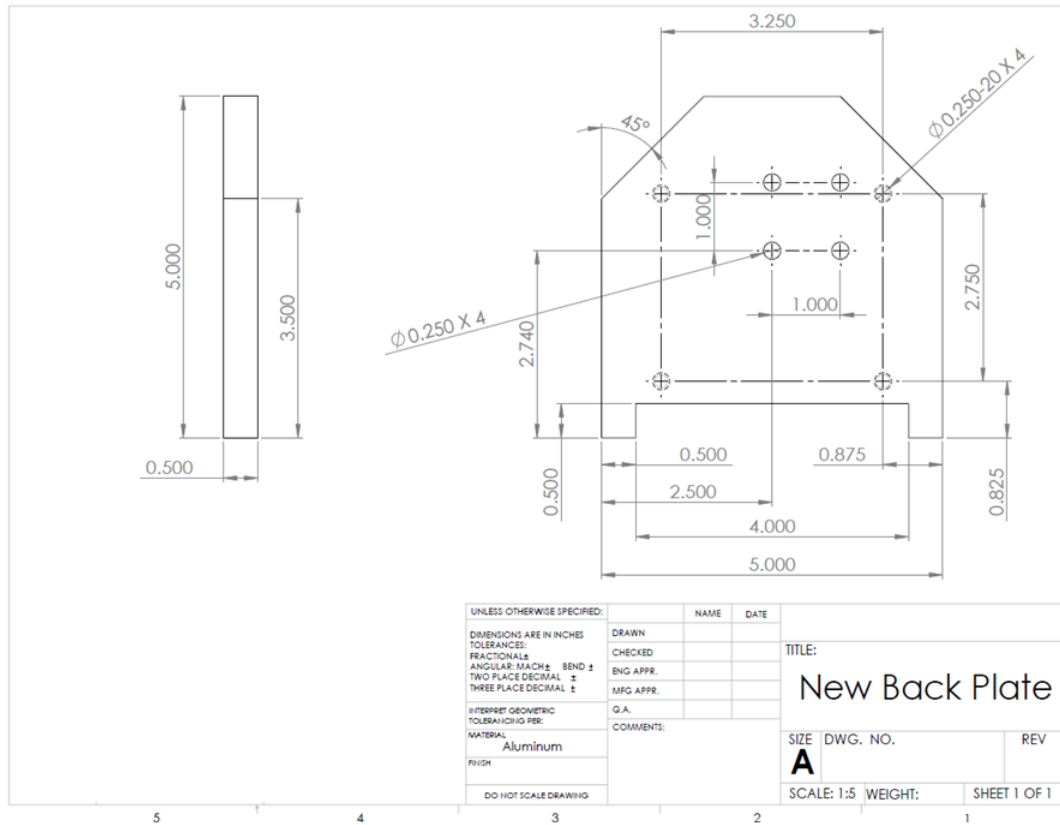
Engineering Drawing of Parts for the Cement Sample Template
